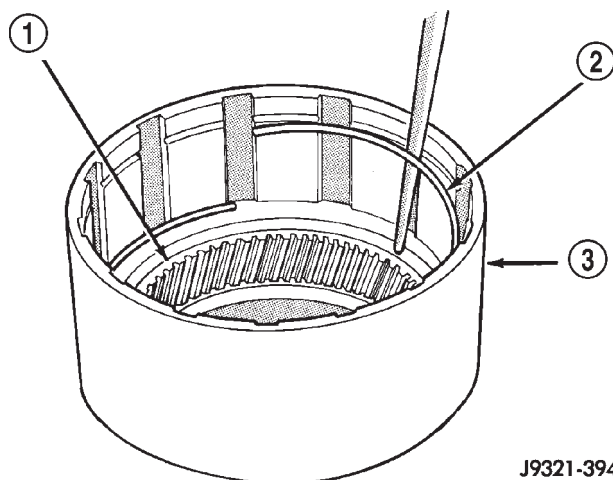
Clutch Drum Inner Retaining Ring Installation
